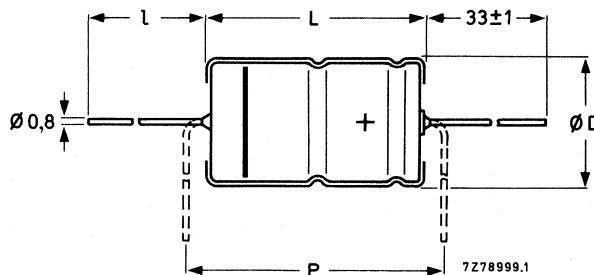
See Table 3 for dimensions φD, L, l and P.
